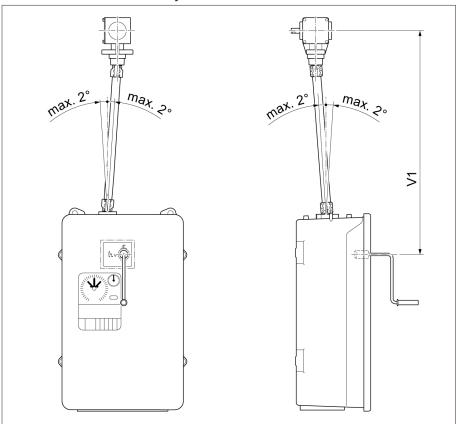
Drive shaft without cardan joint and without insulator (= standard version)
